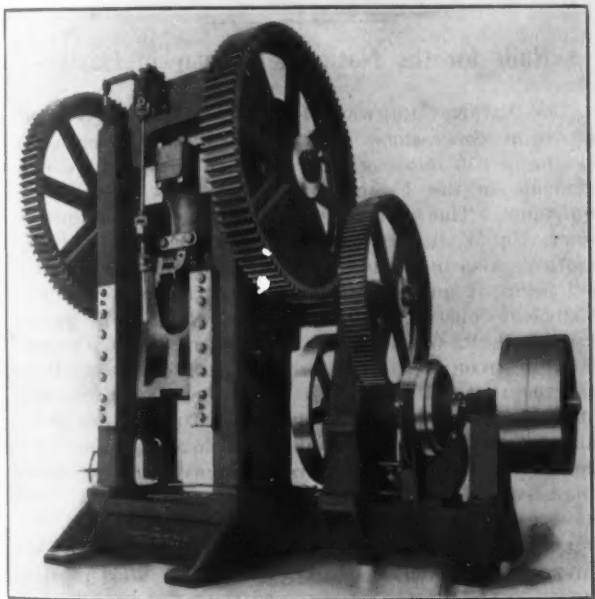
A Single Crank Press Weighing 275,000 Lb. Built by the Toledo Machine & Tool Company, Toledo, Ohio.
